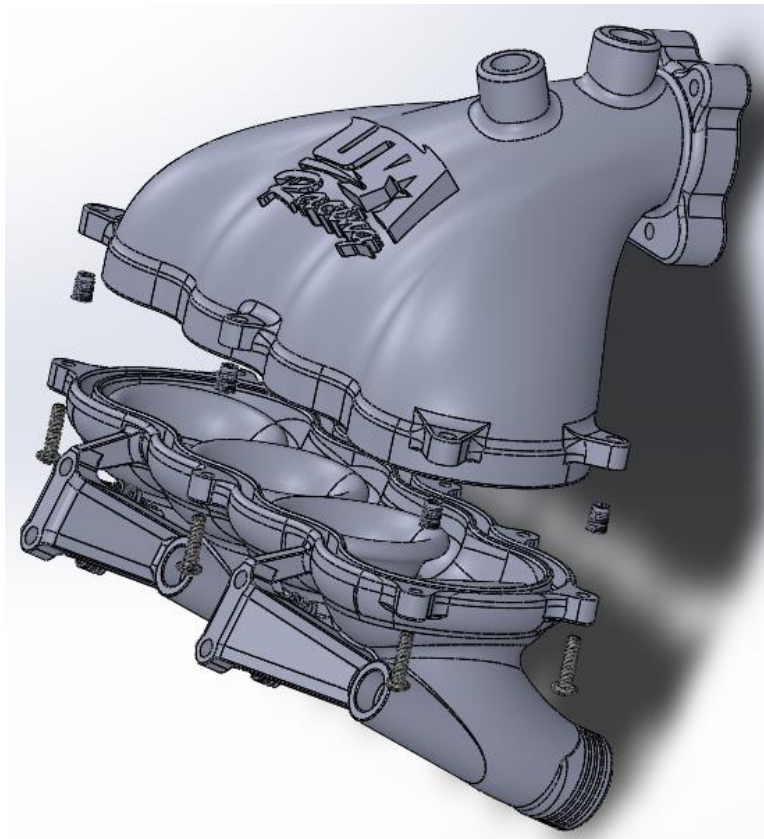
2015 Single Volume Plenum Intake Manifold Assembly
